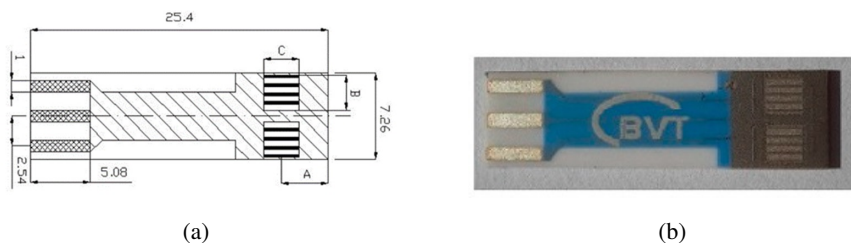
(a) scheme: dimensions A = 4 mm; B = 3 mm; C = 3 mm [38] (b) picture of the CC2 BVT gas-sensor substrate with deposited gas-sensing films.
